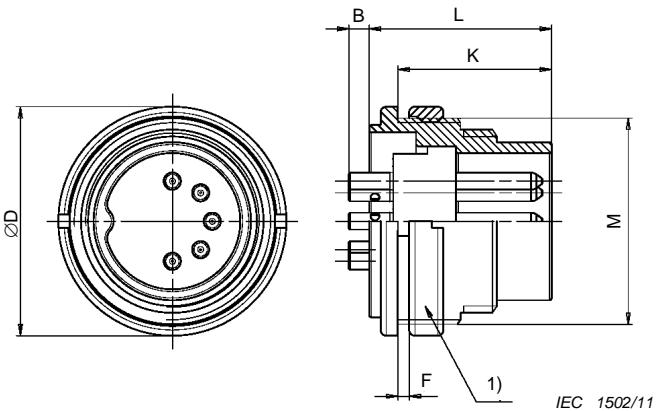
Fixed connector, male contacts, IP40, front mounting
